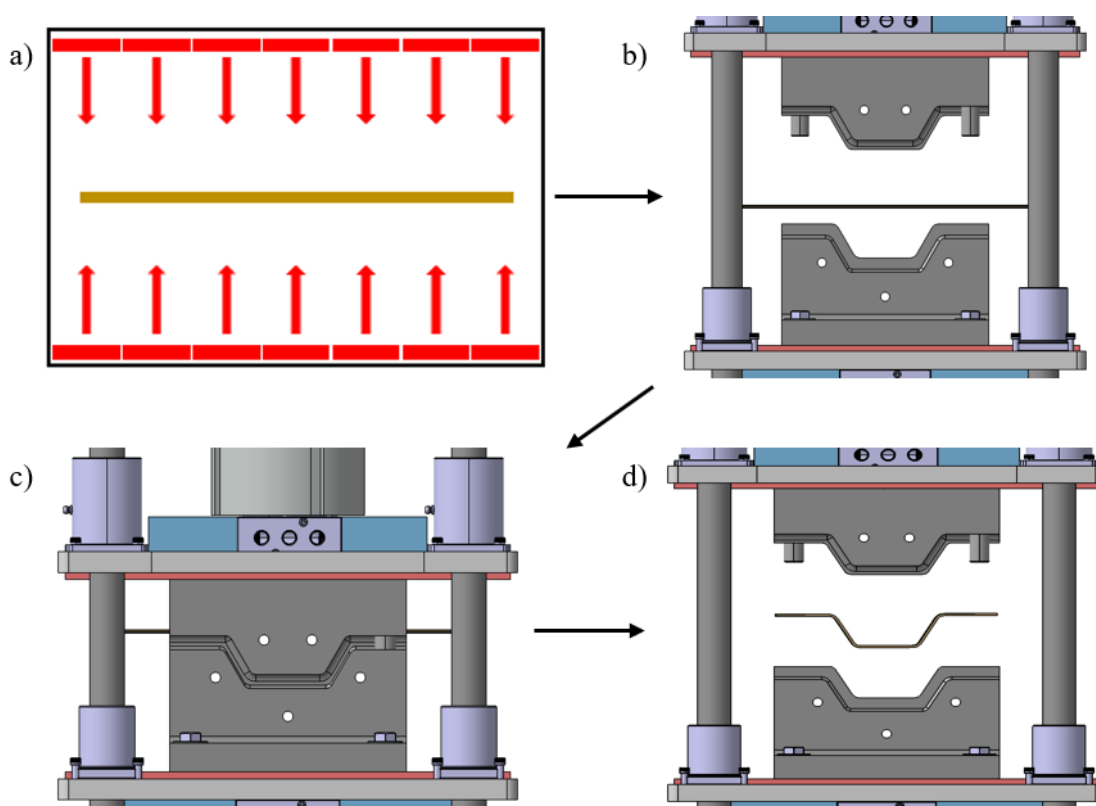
Stamp-forming process used in this study: a) Initial preheating; b) Transfer between the heated matched-die moulds; c) Application of the stamp forming sequence; d) Opening of the upper die and demoulding.
